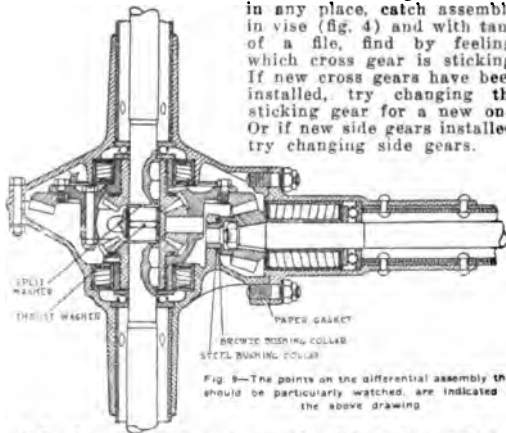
The points on the differential assembly that should be particularly watched, are indicated in the above drawing.
